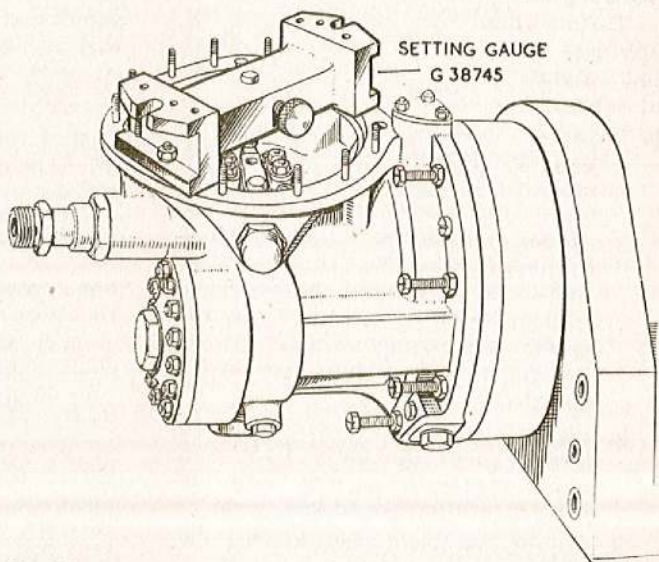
Diaphragm tappet clearance check, unit mounted on rig
